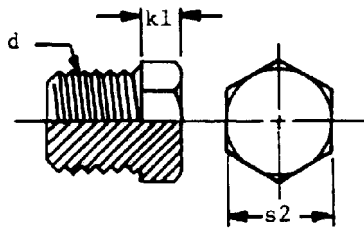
TYPE B HEXAGON OUTSIDE HEAD PLUGS
